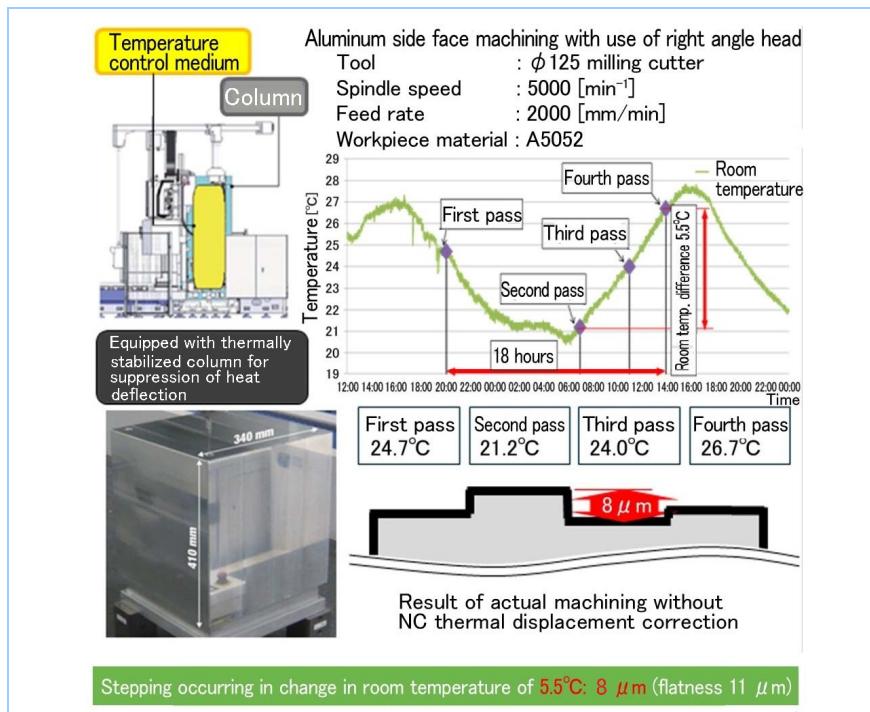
Case example of high-precision cutting (horizontal shaft cutting)
